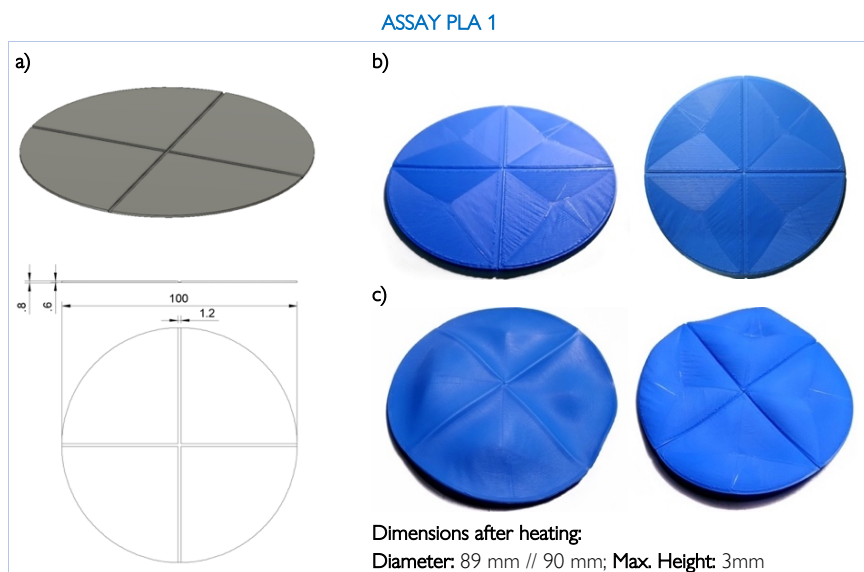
Sample with 0,8 mm thickness and two perpendicular joints. a) 3D model made in Fusion 360; b) 100 mm diameter sample after printing; c) Sample after heating at 95°C and respective dimensions.
